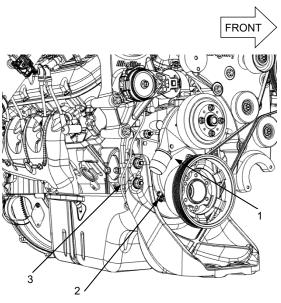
Camshaft (CKP) Sensor Electrical Connector location (2), Engine Front Cover (1), Engine Harness (3)
